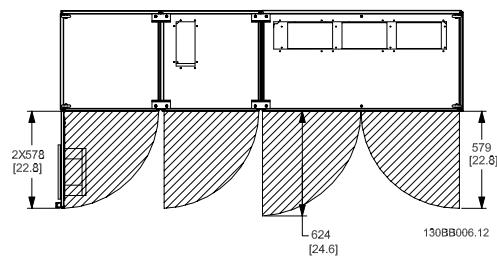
Space in front of IP21/IP54 enclosure type, frame size F4
